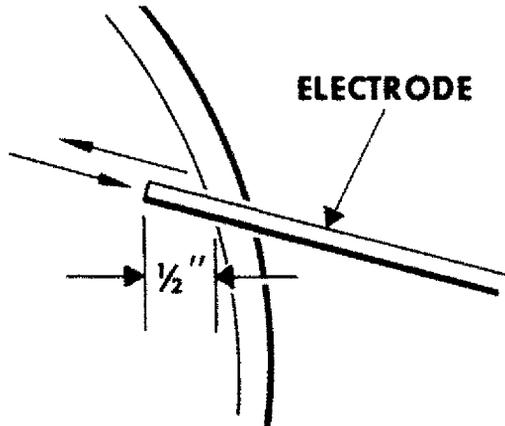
Welder's view when welding the tack weld in the horizontal position. A slight whip should be used, as shown, to prevent the molten metal in the puddle from dripping.
